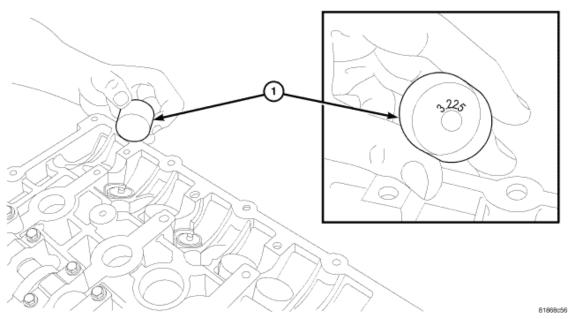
Camshaft Tappet Courtesy of CHRYSLER LLC
